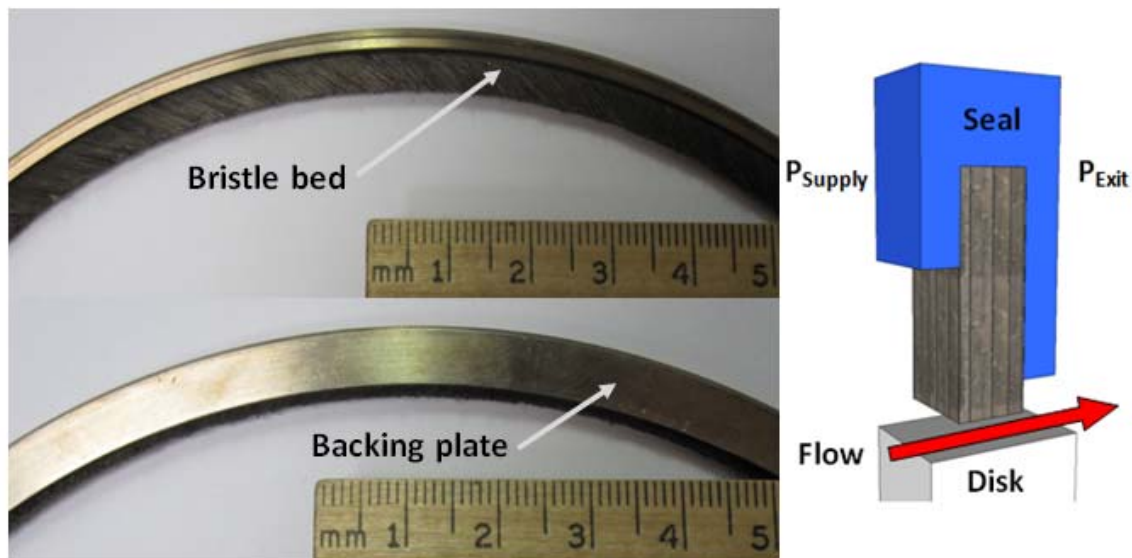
Inner side view of a brush seal and schematic view of thru flow
